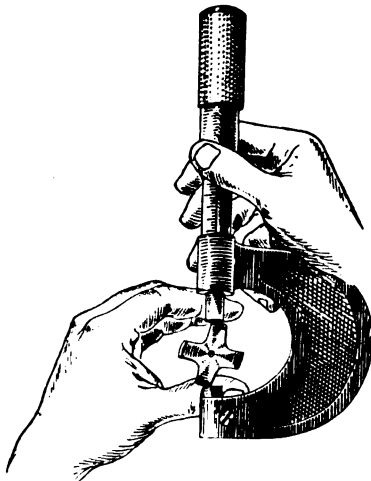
MEASURING THE OUTSIDE DIAMETER OF THE TAP TO INSURE A FULL ROOT DIAMETER
